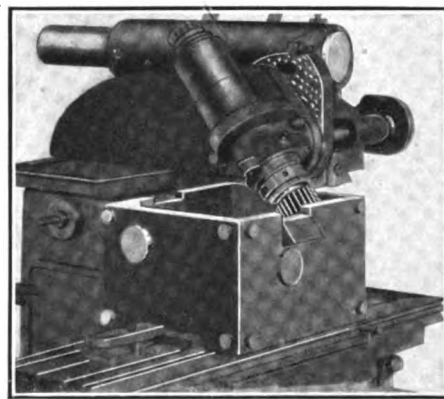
Cutter in main head spindle set to cut an angle surface on the inside of the box.
